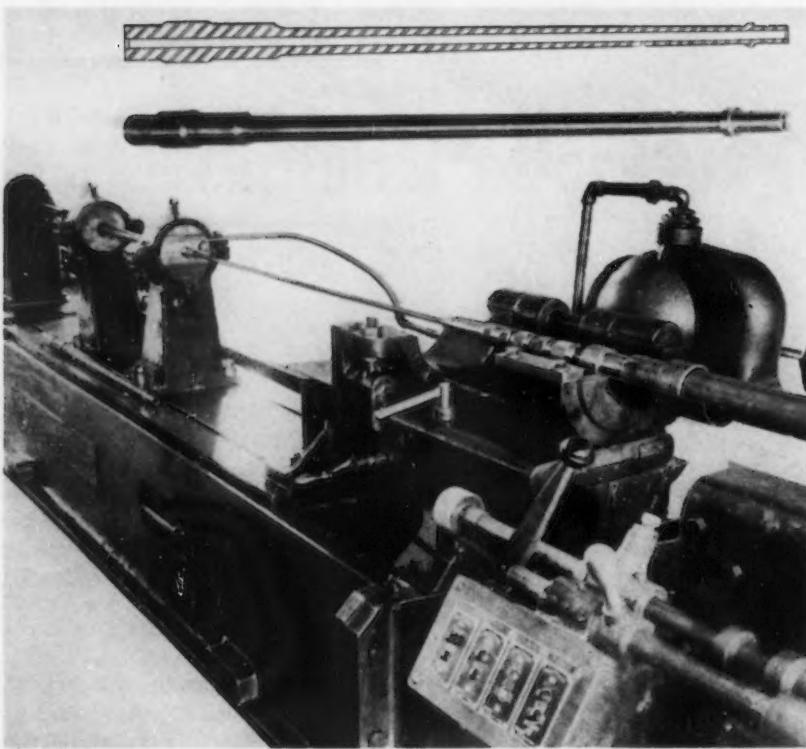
Much has been heard of new automatic rifles. This machine is designed to remove 0.003 to 0.004 in. stock in 1/2-in. bores of forged steel.
